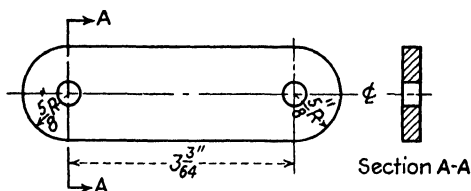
1/8-in. cold-rolled, S.A.E. 1025, 2 holes drilled 3/16 in. diameter.
